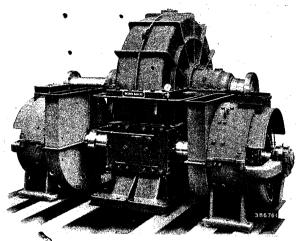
Propulsion motors and reduction gears for the drive of the paddle-wheel shaft.
